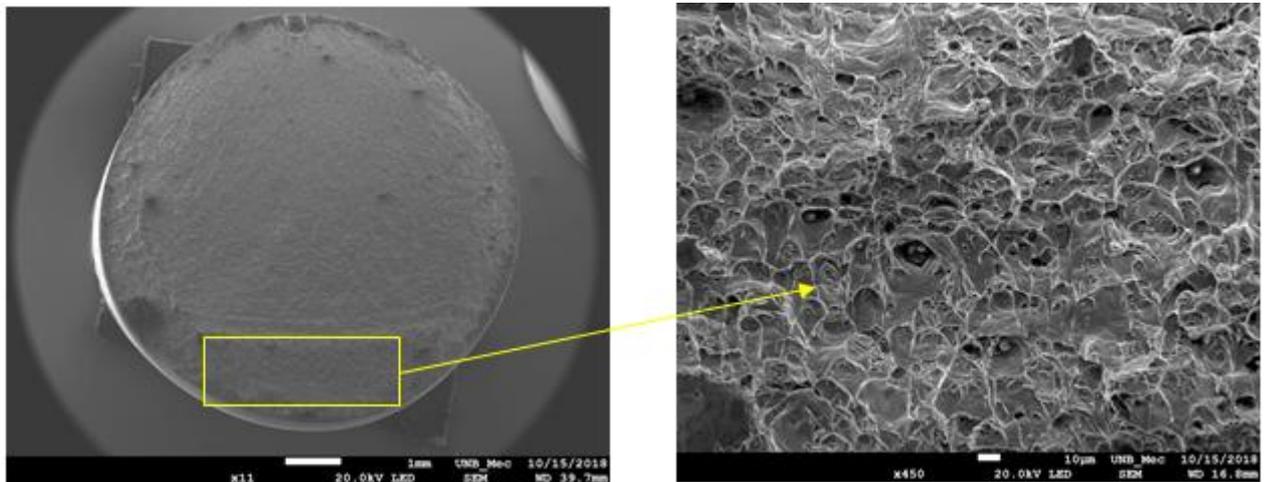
a) Surface of fracture of specimens with defect of \varnothing 0.45 mm. MEV. 11x. b) Dimples found in the final fracture region. MEV. 250x.
